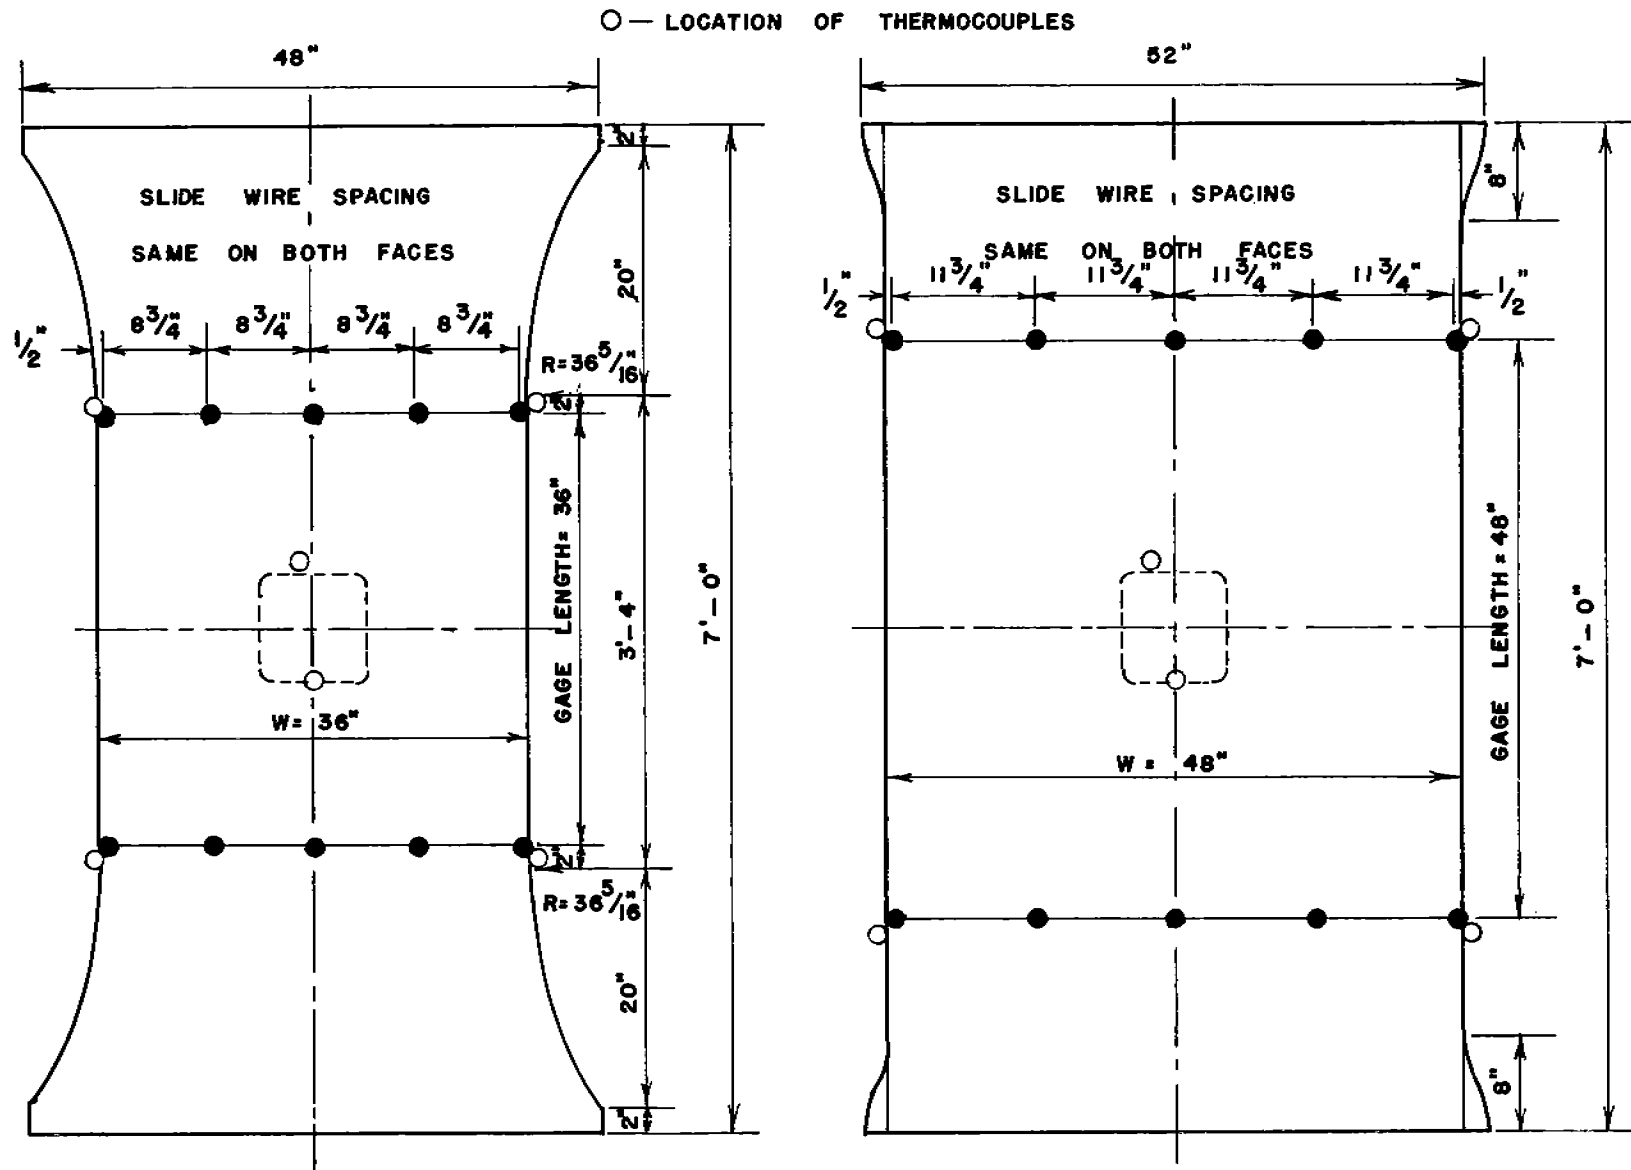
Body Plates of 36-in. x 1/4-in. and 48-in. x 1/2-in. Specimens. Location of Slide-Wire Resistance Gages and Thermocouples.
